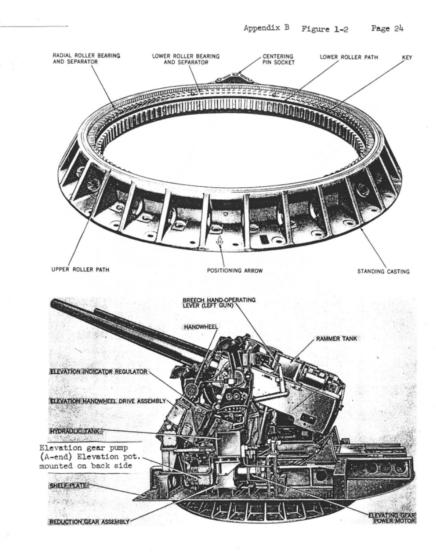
5-inch Mount Mk 32 Mod 2. Shield Removed-Left Side.
